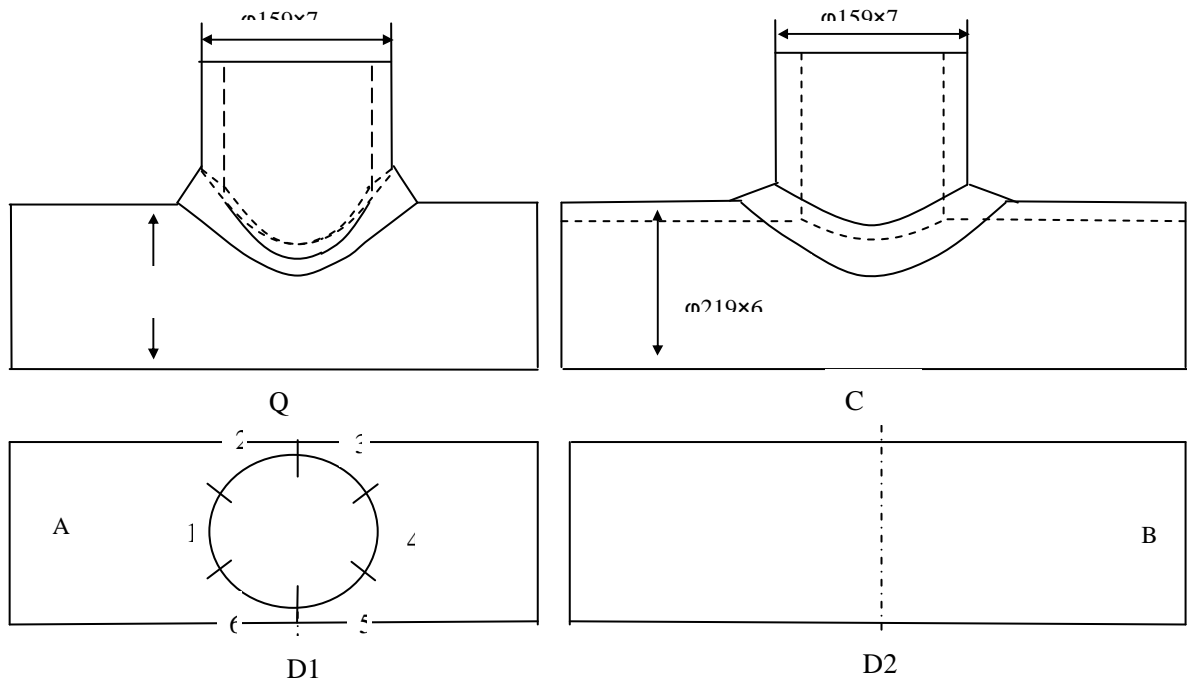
the section's sketch map to place the film for the type of rode, type of inserted uprightness intersection pipe welds
